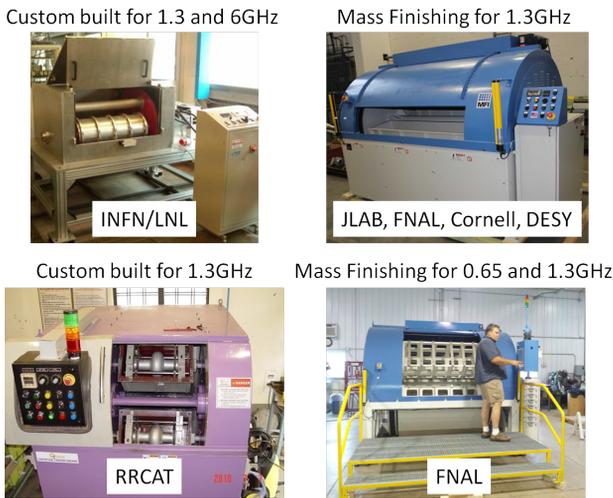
CBP machines from around the world. Designed elliptical cavity frequency, manufacturer if built outside the host laboratory (custom if built inside the lab), and lab location is shown in the text for each machine.
